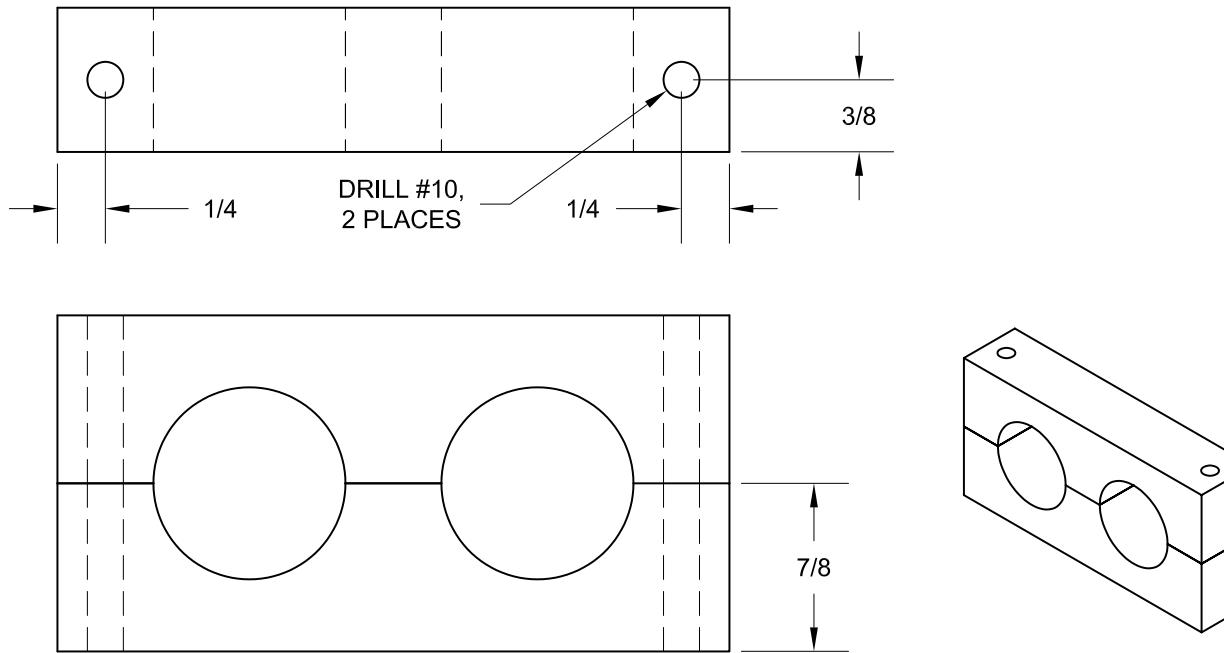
MODIFYING THE F-1039B BEARING BLOCK
